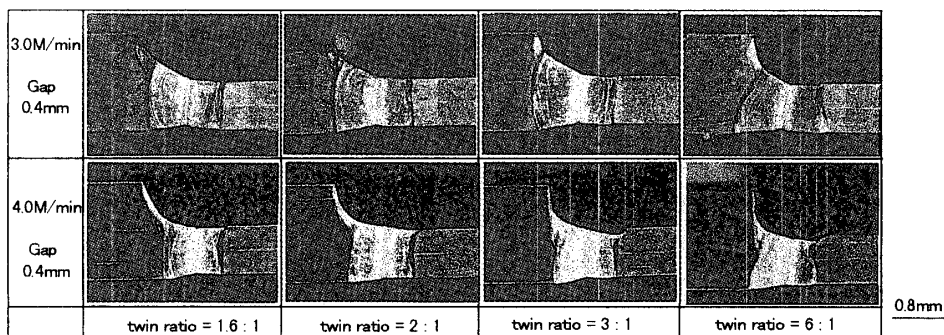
Cross section of differential thickness butt joints with twin spot laser welded.
